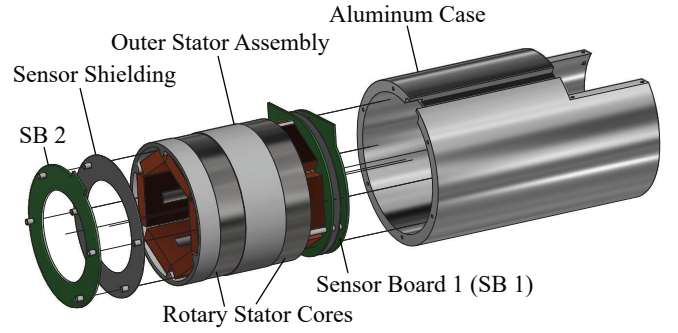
CAD model of the SBDS LiRA outer rotary stator prototype, with PCB position sensor boards at both axial ends and a power connection PCB. The rotary stator core and windings are inserted into an aluminum case and potted.
